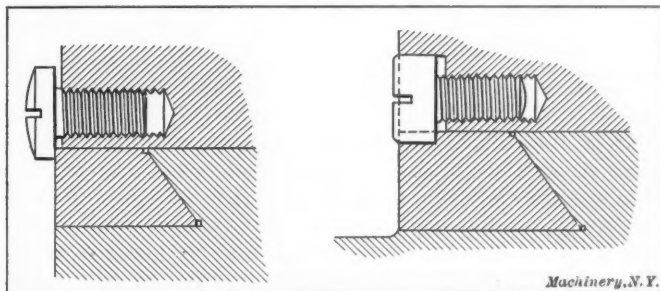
and 8. Strips with Countersunk Square Heads and Collar-head Adjusting Screws
